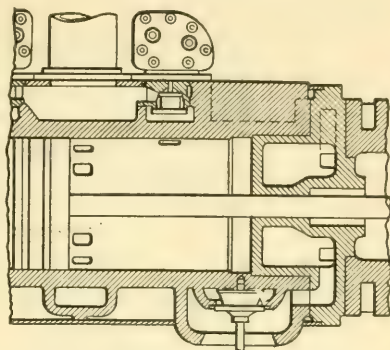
Double Seated Exhaust Uniflow Steam Engine.
